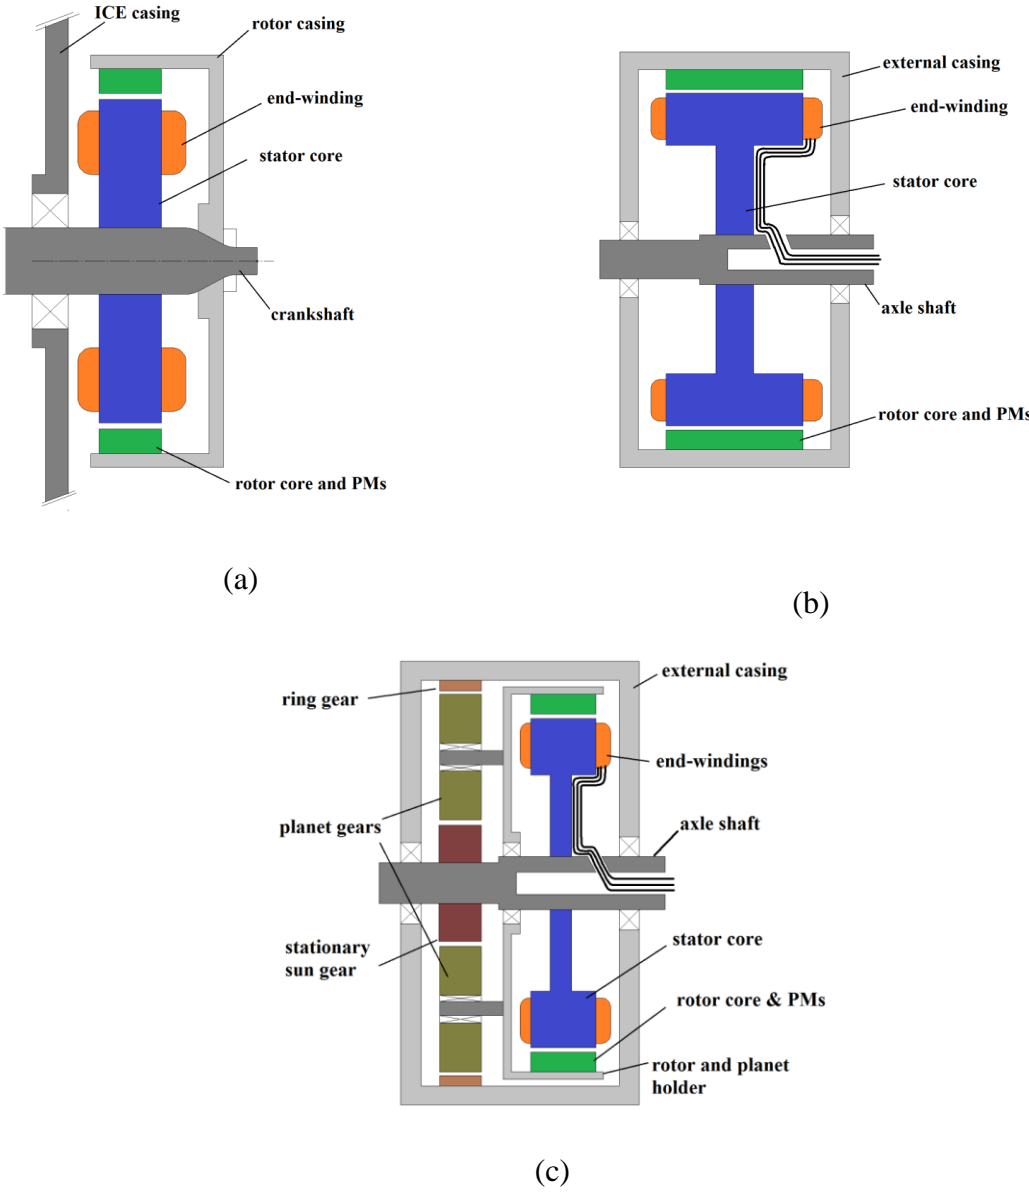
The mechanical arrangement for motors used in two-wheeler applications: (a) ICE crankshaft mounted, (b) in-wheel direct drive, and (c) in-wheel geared drive
